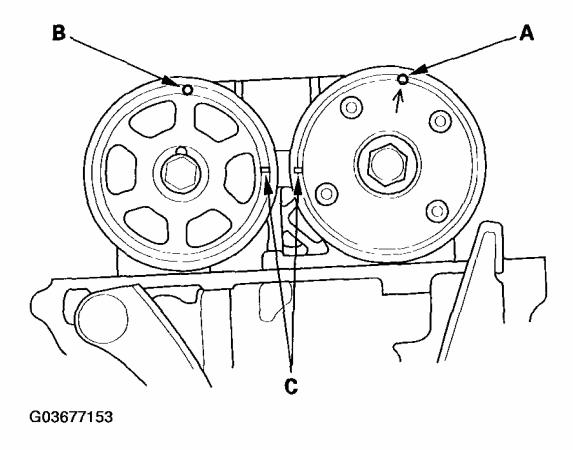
Identifying VTC Actuator And Exhaust Camshaft Sprocket Punch Mark Position
